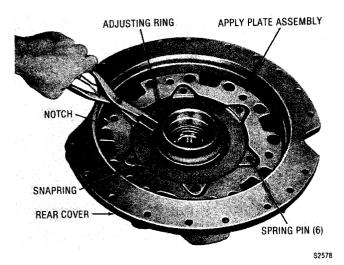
Removing (or installing) brake-apply plate snapring (TTB)
